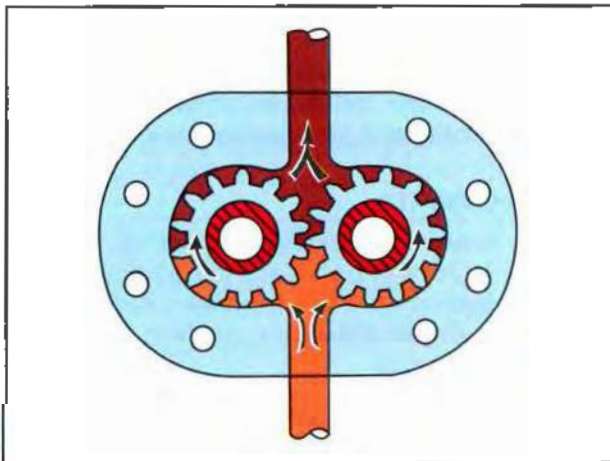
In a gear oil pump, two spur gears rotate inside a housing to pump oil through an engine.
